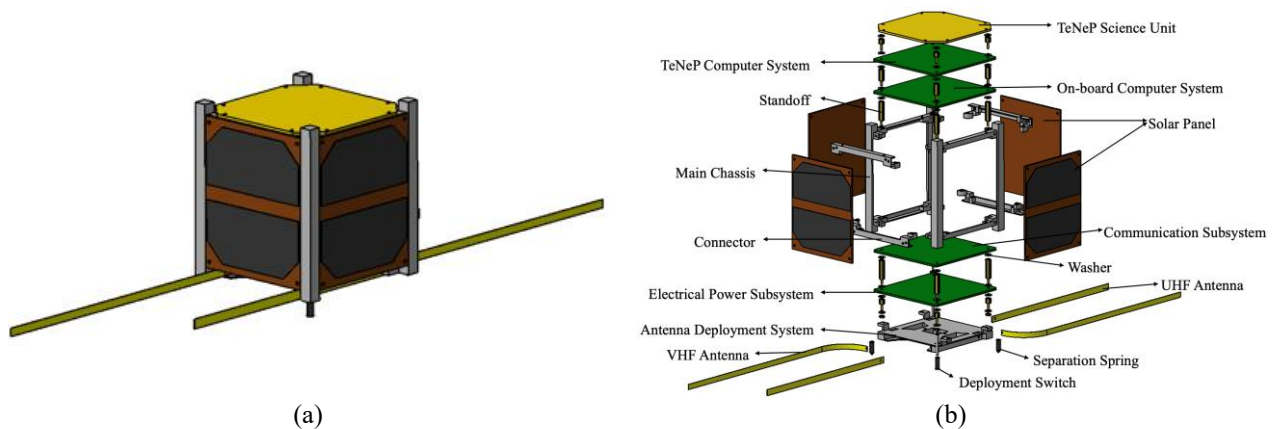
MYSat design: (a) Assembly design and (b) Exploded view of MYSat
